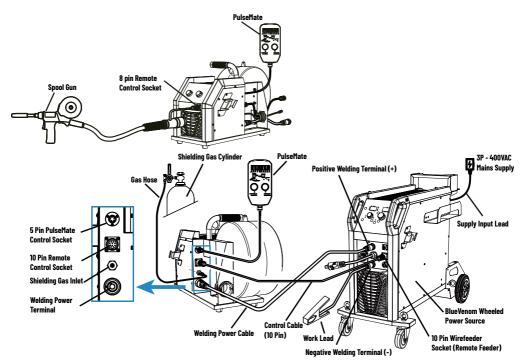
Setup with Spool Gun for Gas Shielded MIG Wire
